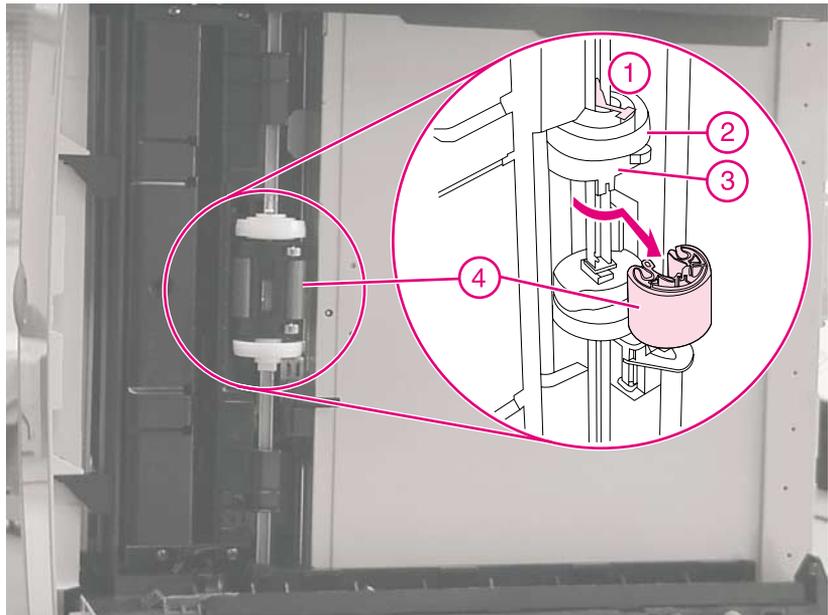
Removing the Tray 2 pickup roller (bottom of the printer)
